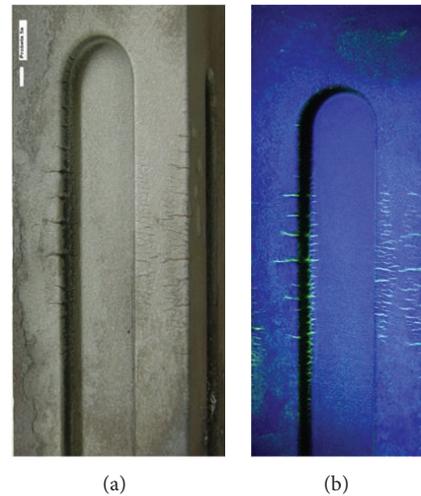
Thermal stress produced cracks observed (a) under magnetic particles, (b) after sand blasting.
